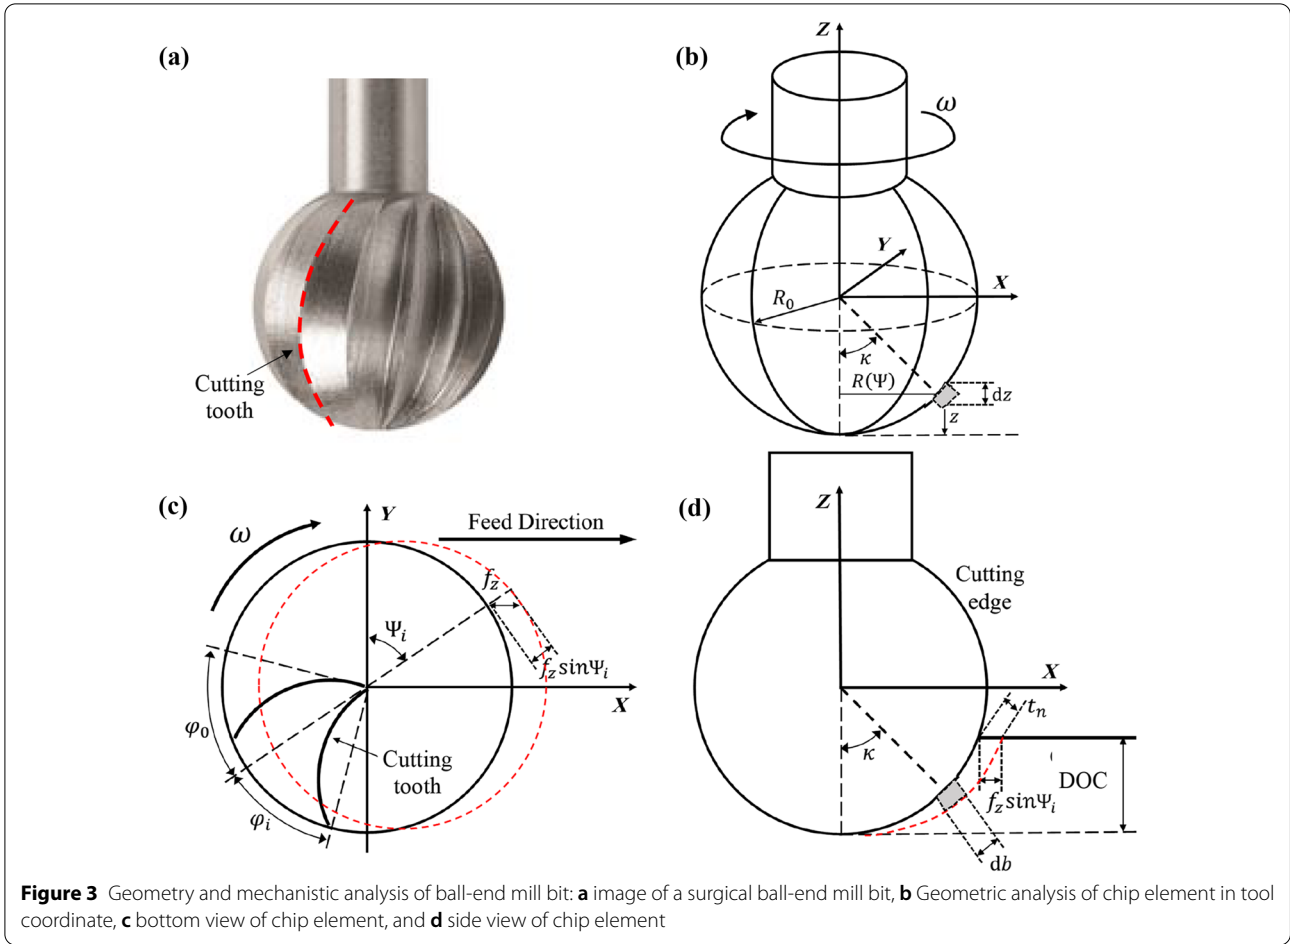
Geometry and mechanistic analysis of ball-end mill bit: a image of a surgical ball-end mill bit, b Geometric analysis of chip element in tool coordinate, c bottom view of chip element, and d side view of chip element
